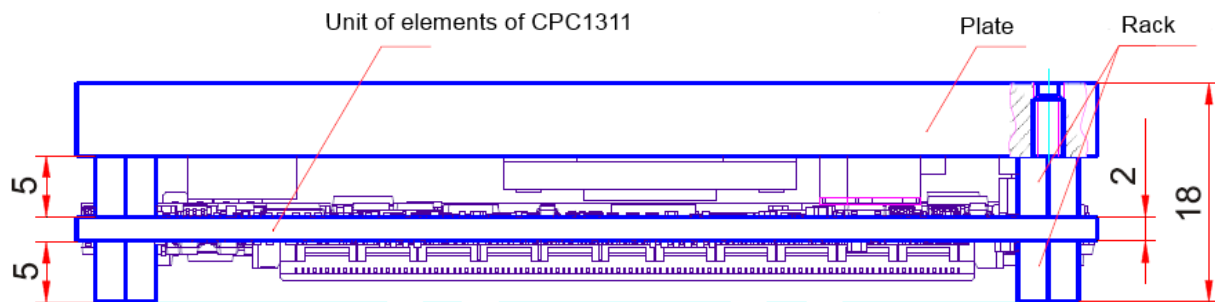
Overall and mounting dimensions of the module (top view)
